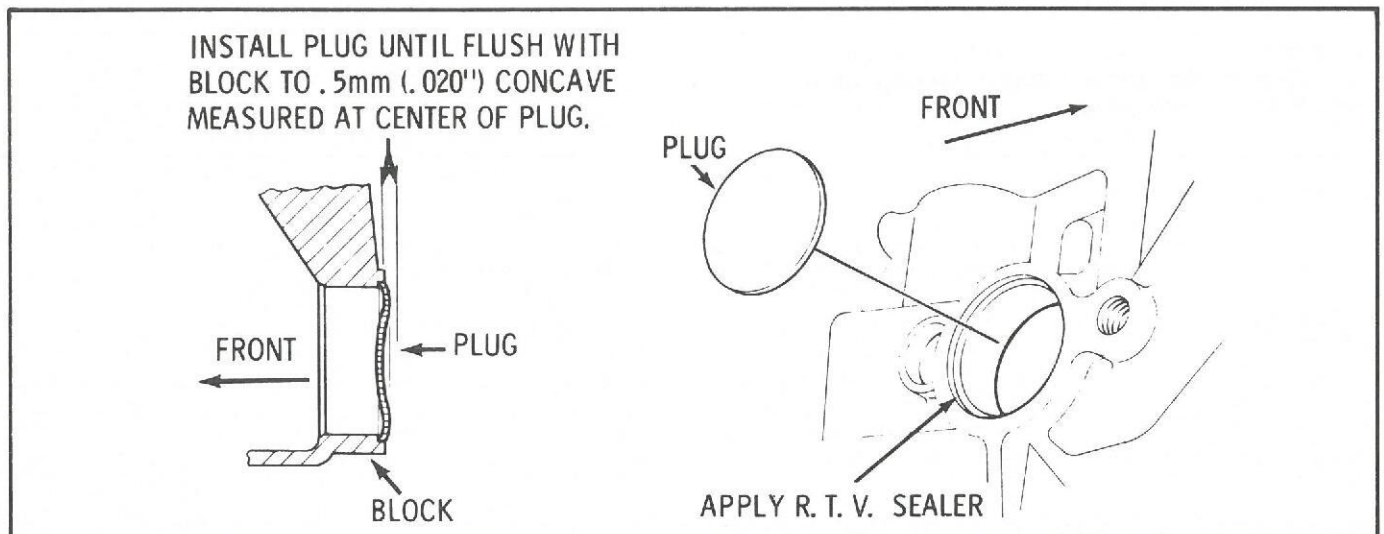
A-1 - Rear Camshaft Plug - V6 Diesel
